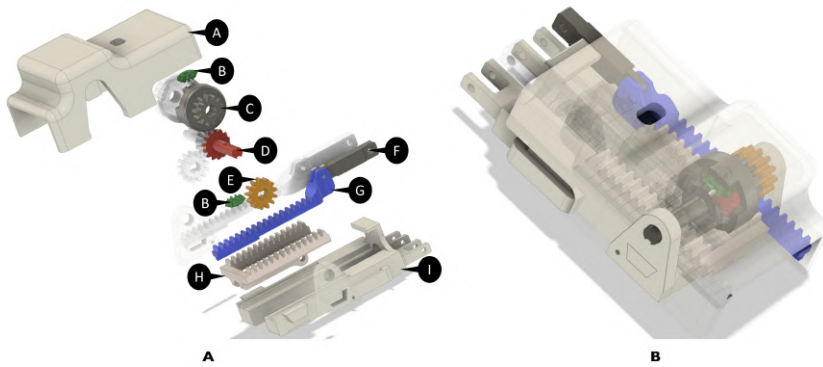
A Exploded CAD view of the differential mechanism. (A) differential mechanism cover box; (I) support for the linear actuator and for the differential mechanism parts. The differential mechanism is composed of: two satellite gears (B), two gears meshed with the shafts (D), two differential's branches (G,F), a rack (H), and two spur gears (E) meshed with two crowns (C). B Assembled differential mechanism.
